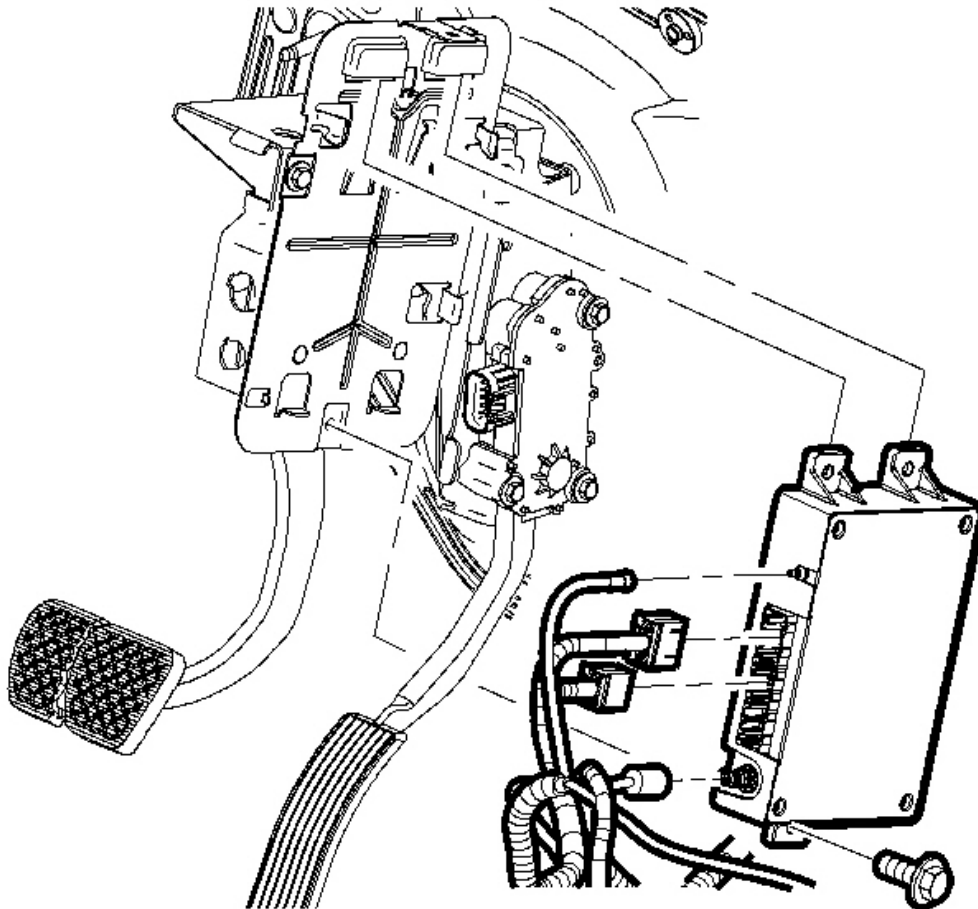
View Of Communication Interface Module (CIM) & Fastener
